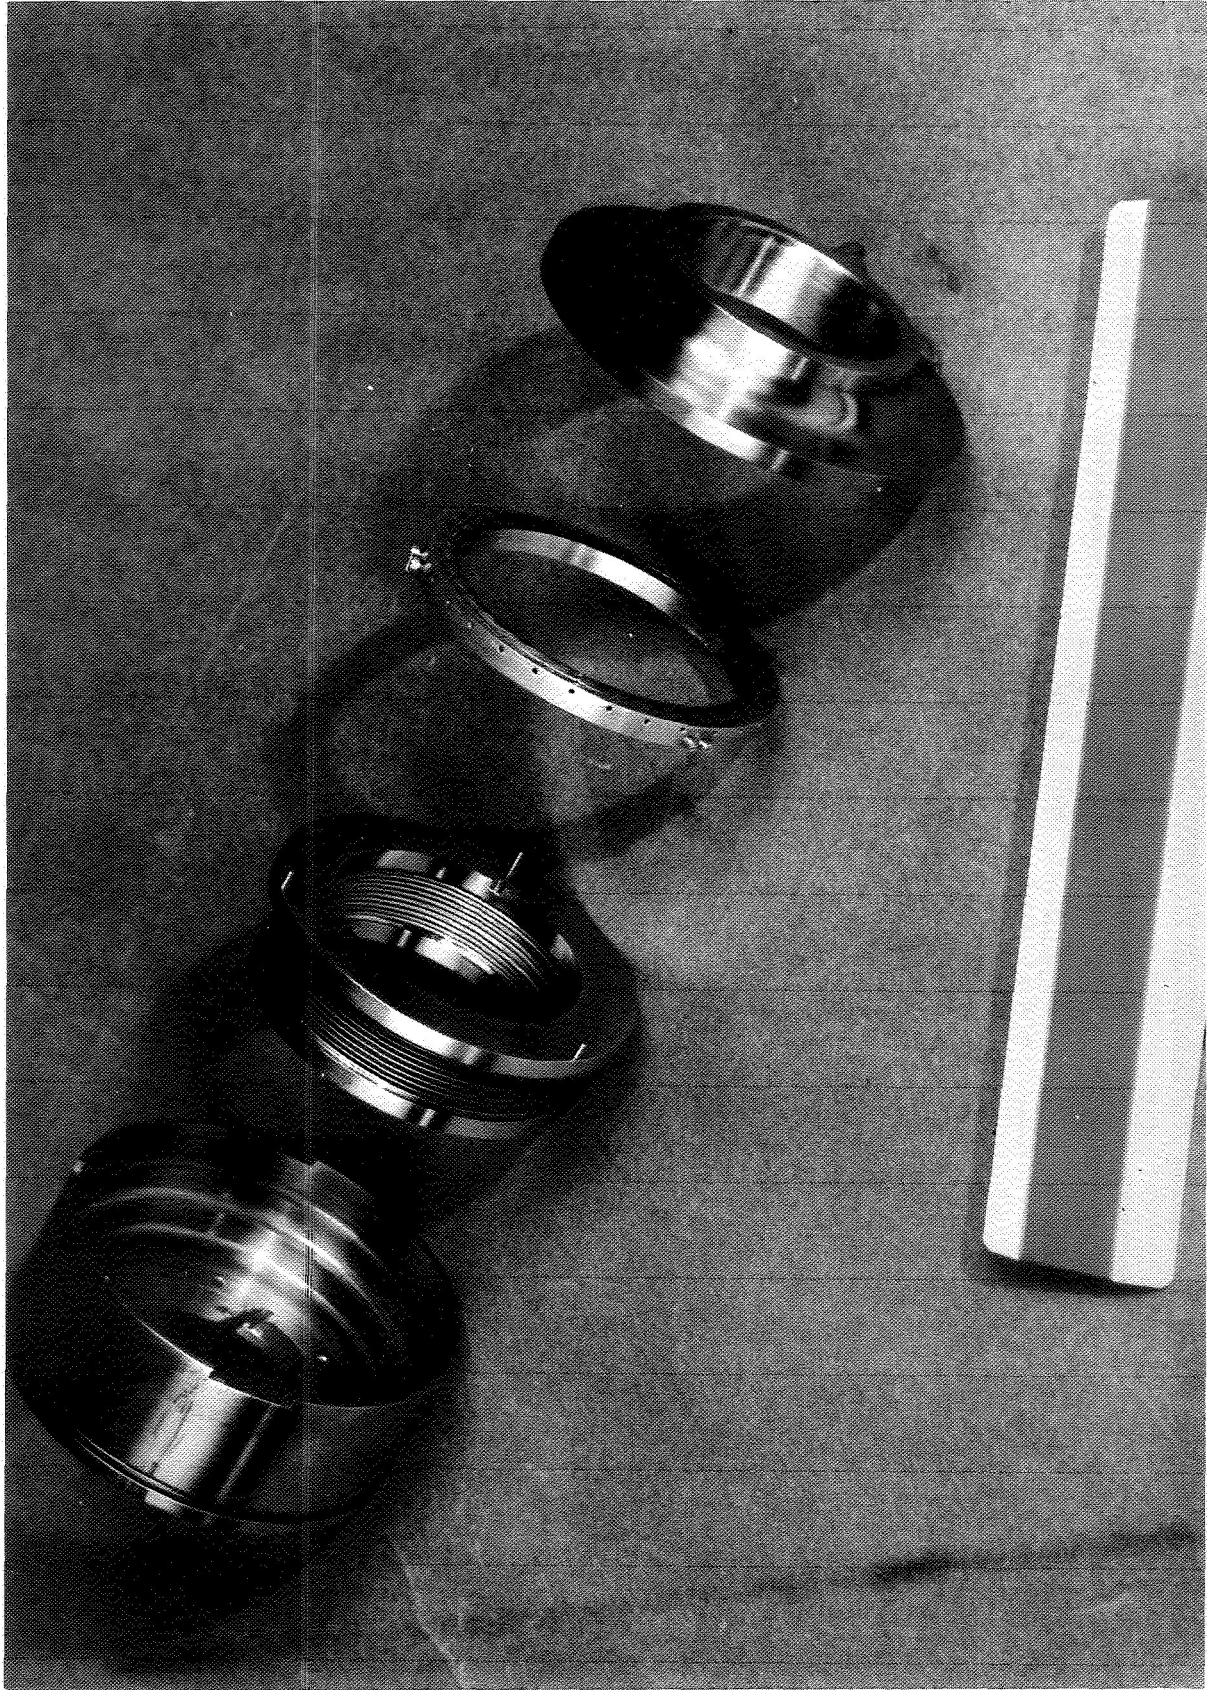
SNAP-8 Spiral Groove Seal Extended View
